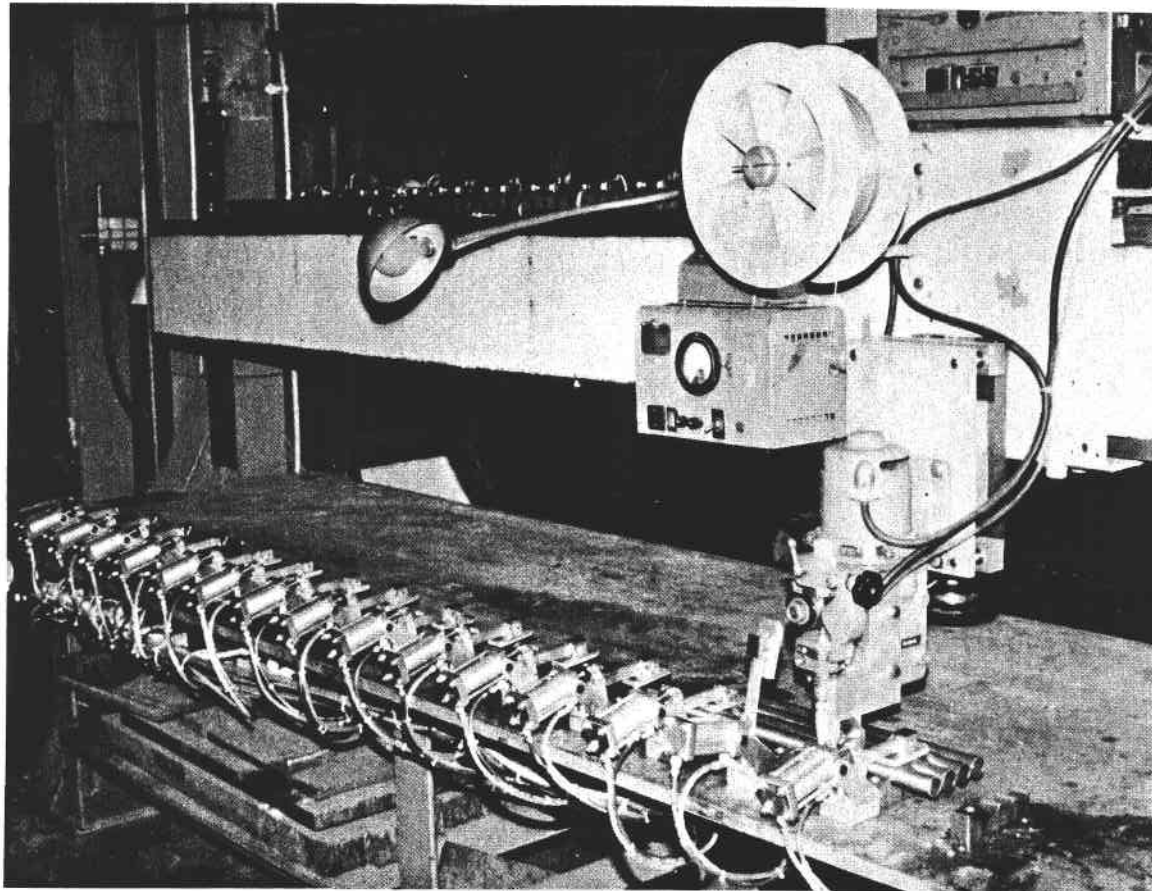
Overall View of Welding Set-Up Showing the Welding Head, Wire Reel, Controls, Cross-Beam Carriage, and Pneumatically Actuated Toggle Clamps
